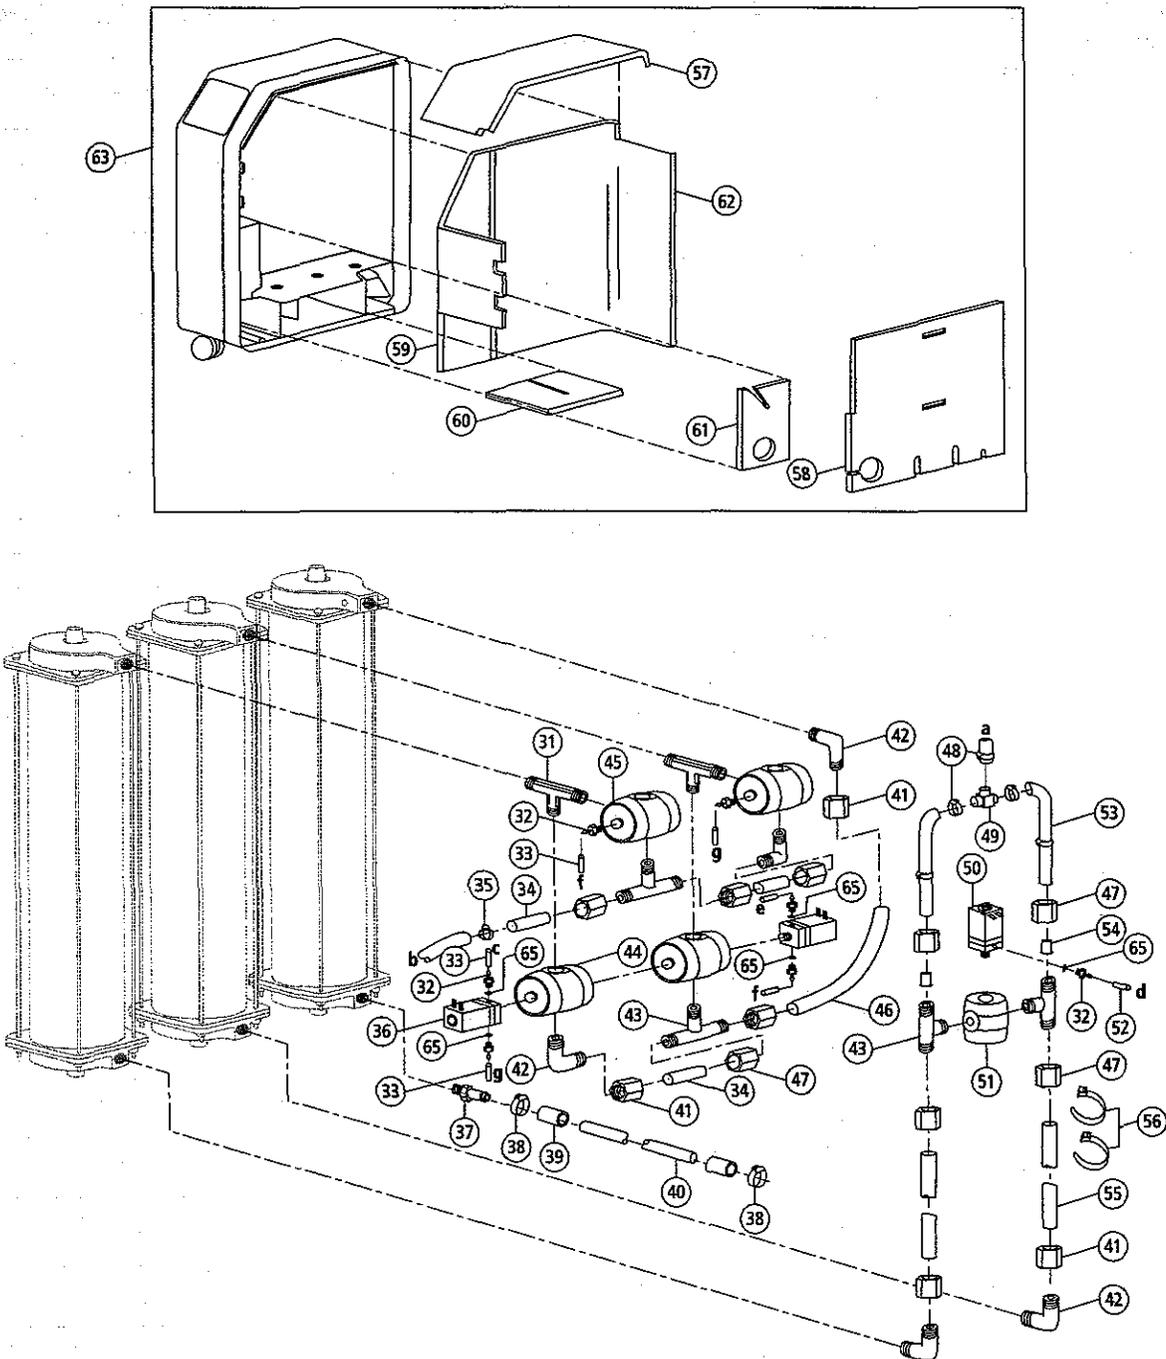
Left Cabinet Interior with Threaded Rod Sieve Beds
